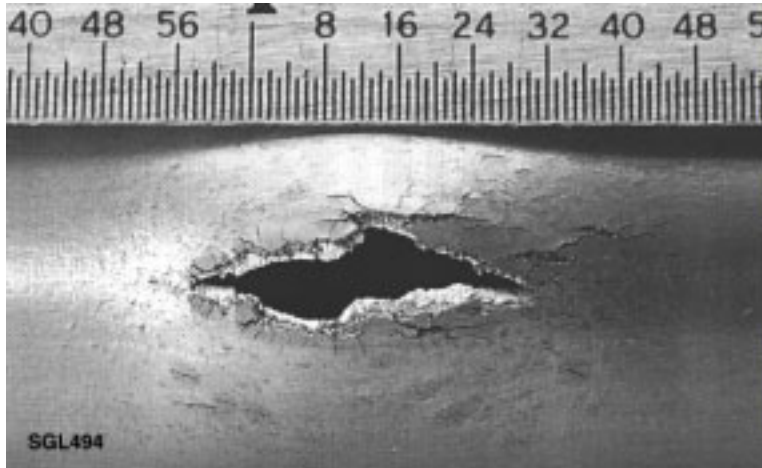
Post-test view of the OD surface of specimen SGL 494.
